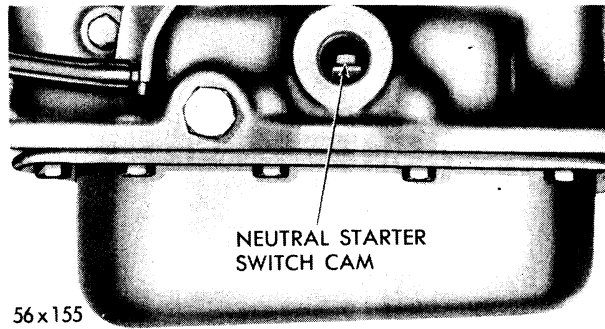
Neutral Switch Cam Centered in Neutral Start Switch Mounting Hole
